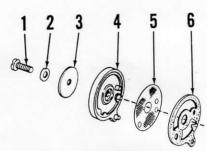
Exploded view of diaphragm type fuel pump used on some models.
